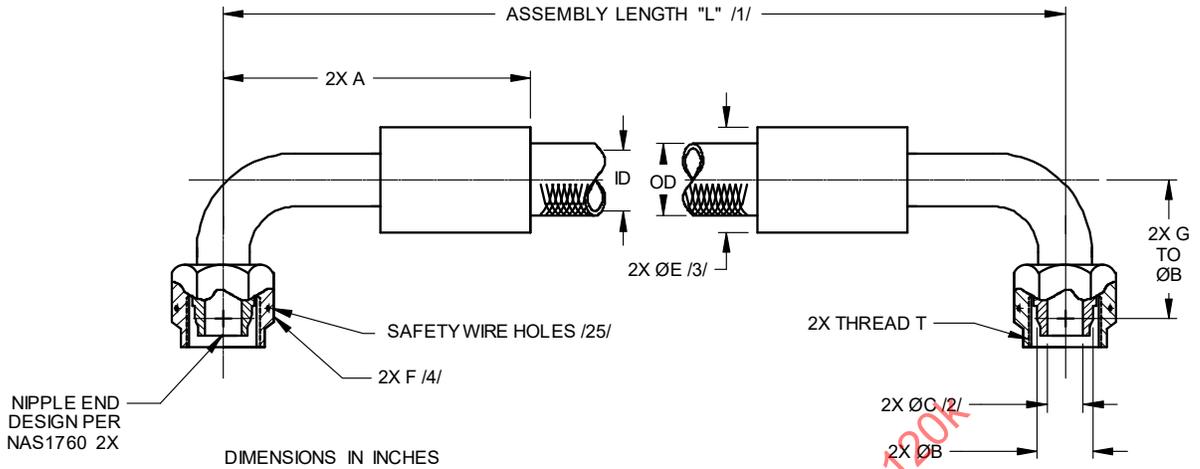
HOSE AND FITTING DIMENSIONS
